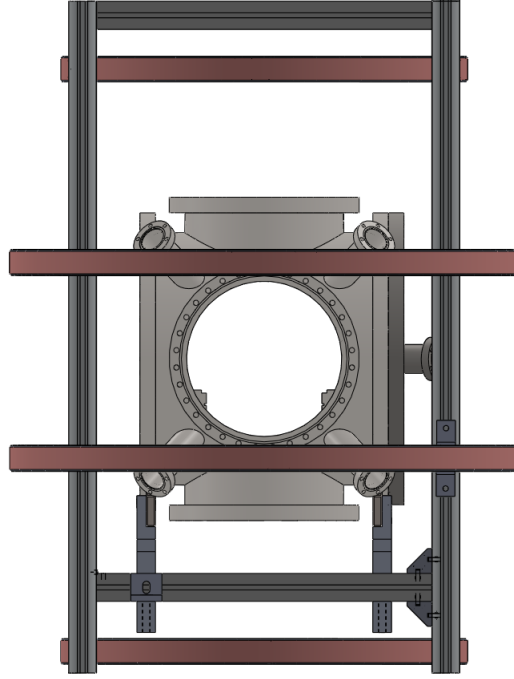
Camp chamber without spectrometer inside and outer frame holding the four magnetic coils at an equal distance. The coils are hold with l-shaped clamps that are connected to the minitec frame.
